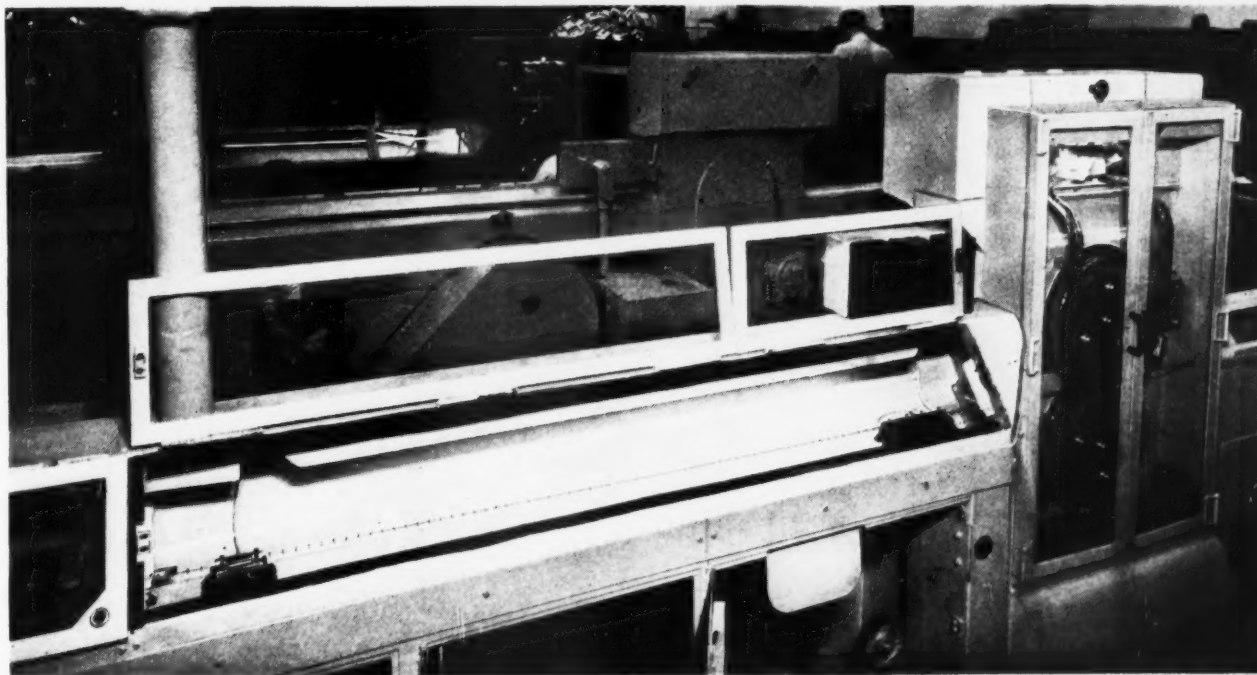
Coaxial forming machine showing insulated center conductor (lower foreground) passing through high-voltage electrodes.
